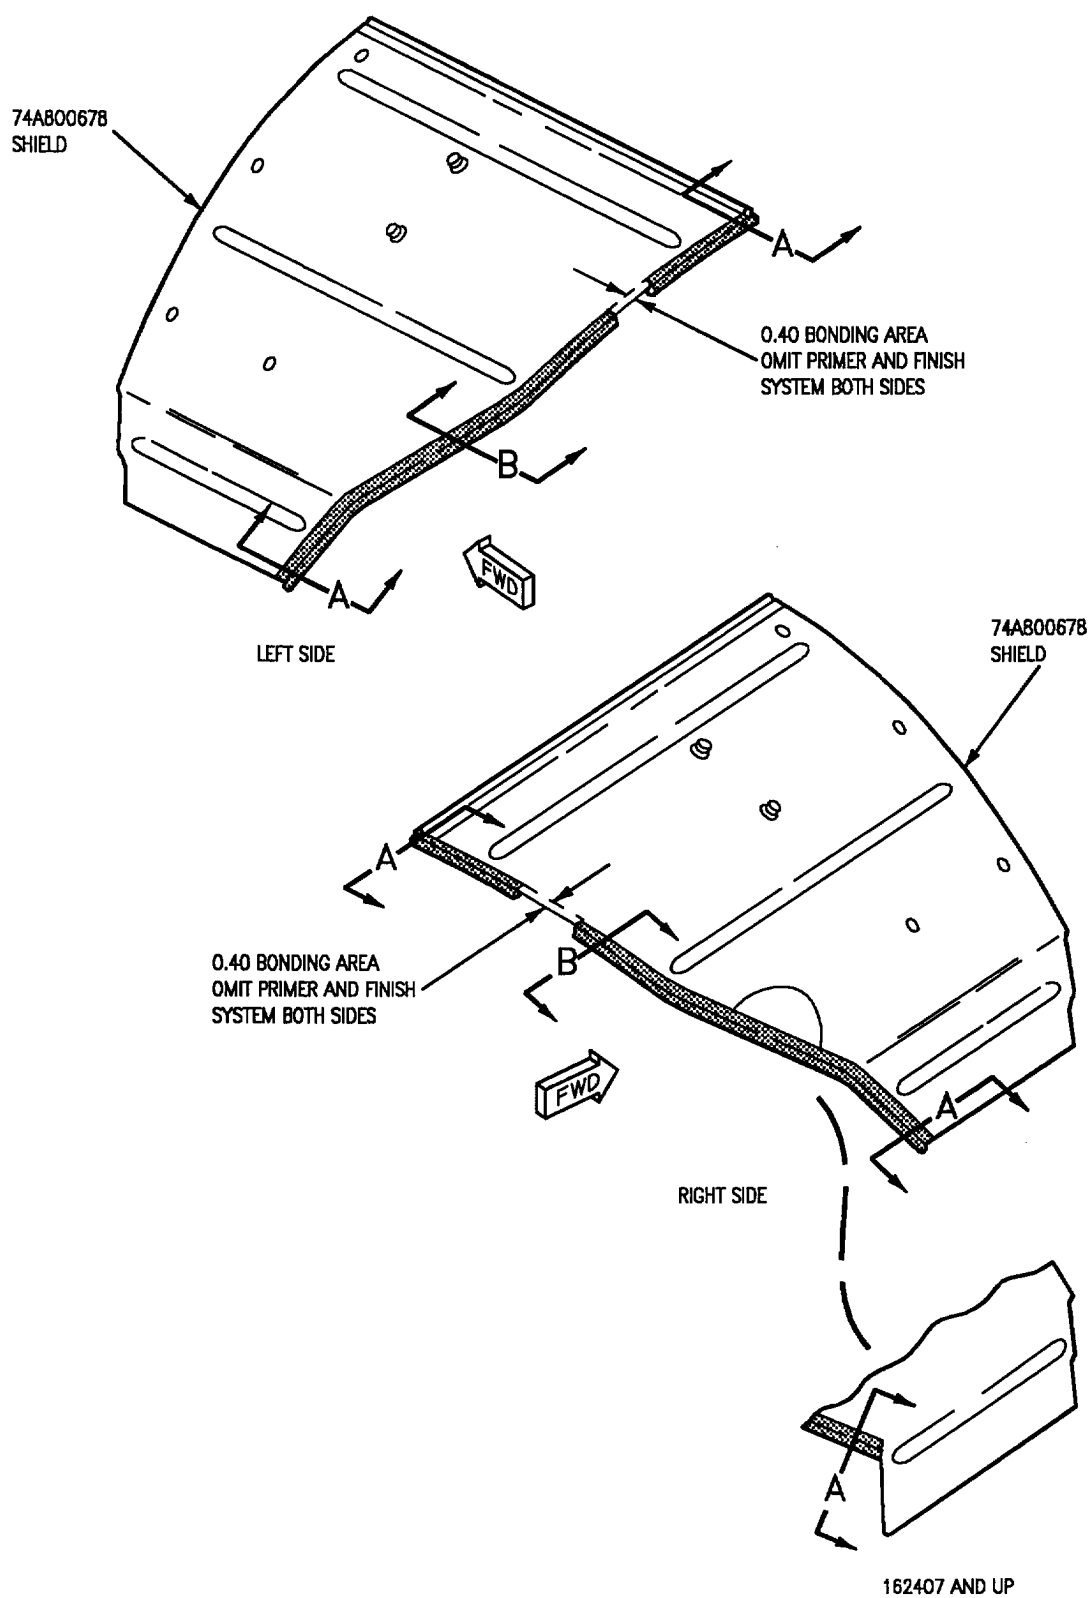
11M1016-1 Strip Replacement (Sheet 1)
